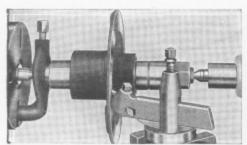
Truing Hub Flange of Wood Wheel Mounted on a Mandrel Between Lathe Centers
